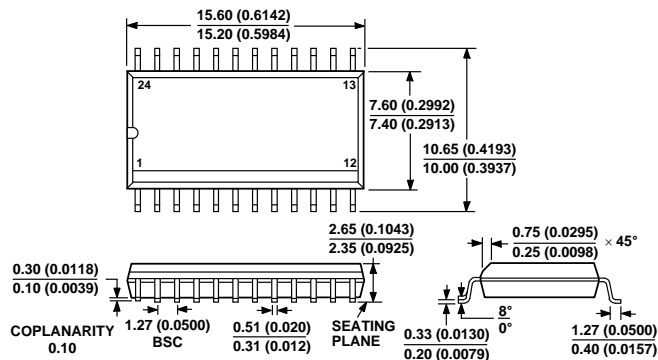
24-Lead Standard Small Outline Package (SOIC)
